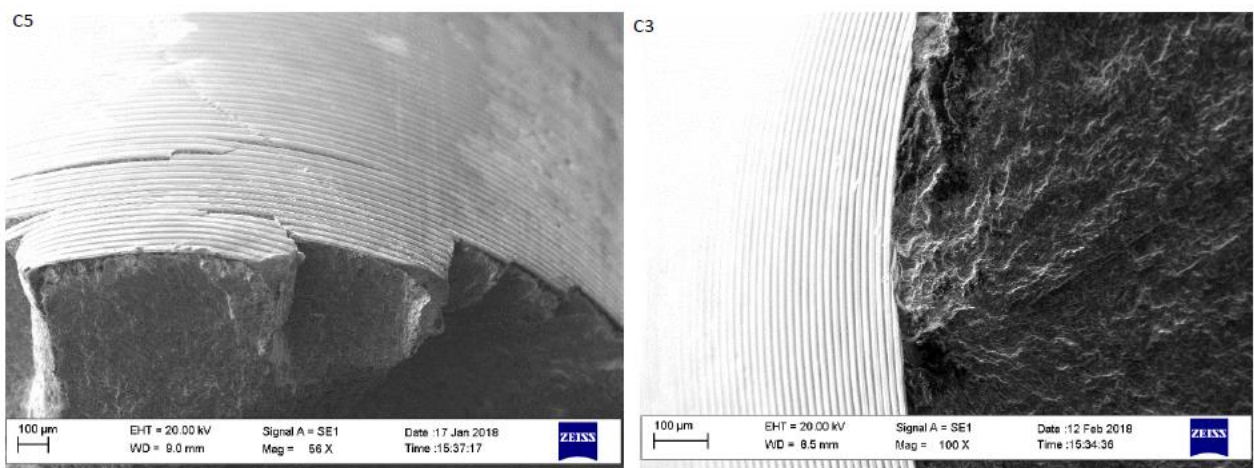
Sample having very low fatigue life due to cracks initiated at improper machined surface
